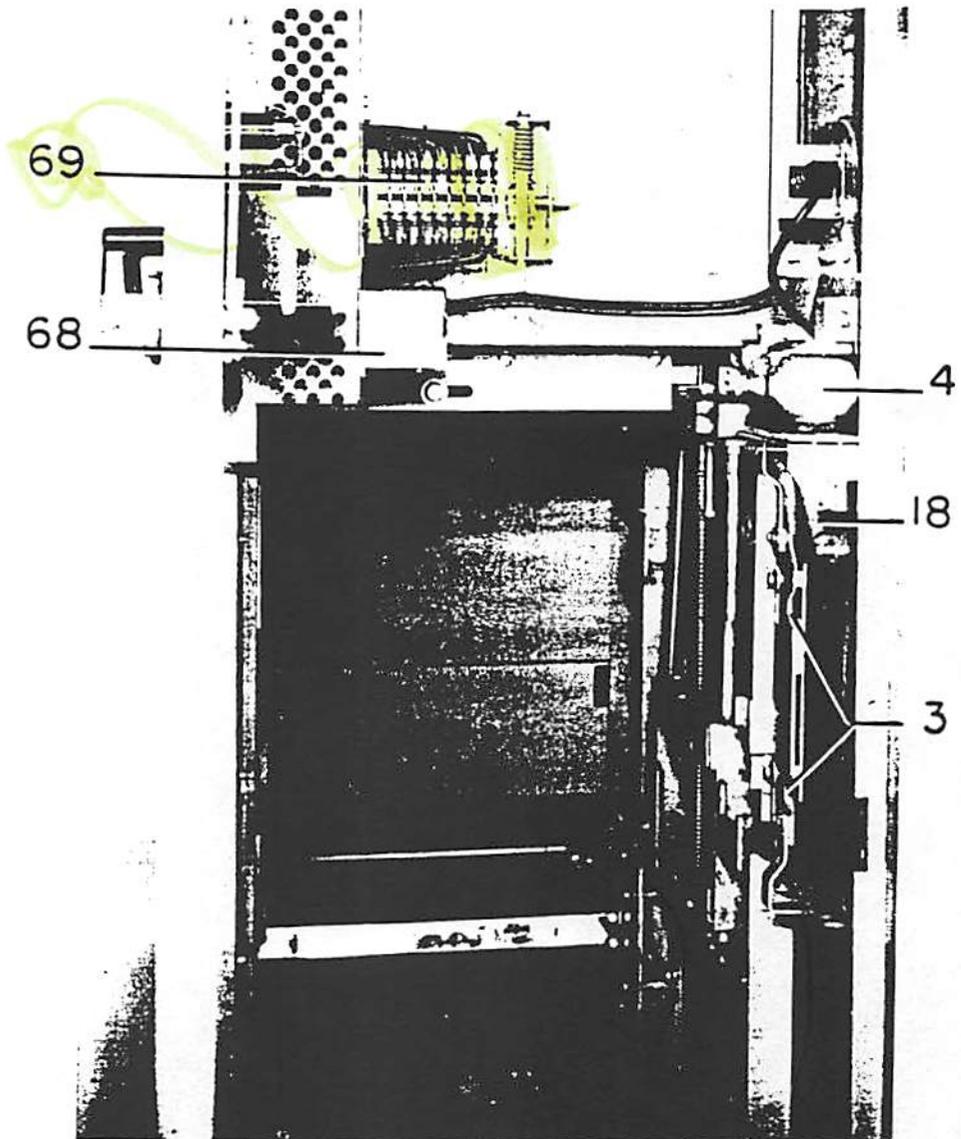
A VIEW SHOWING ELEVATING MECHANISM MOTOR AND CONTROL UNIT
